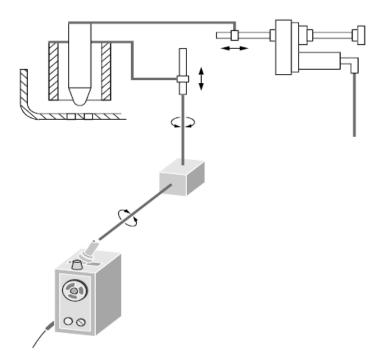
Mechanical feeder with tube height and plunger position adjustment
